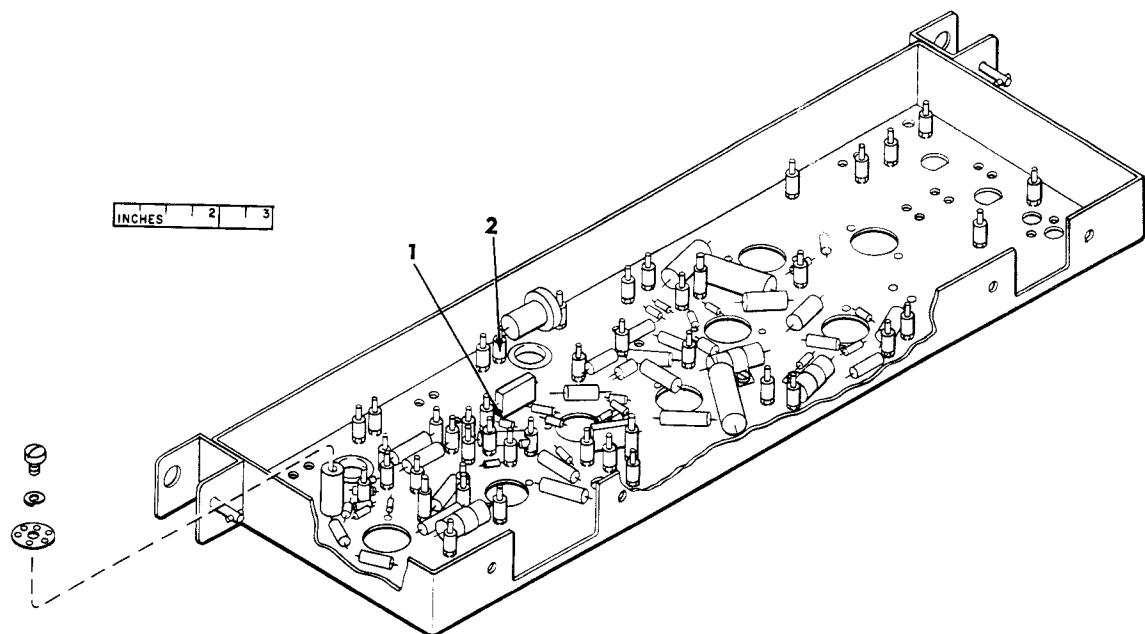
Generator, pulse sweep (9139349)—partial exploded view
